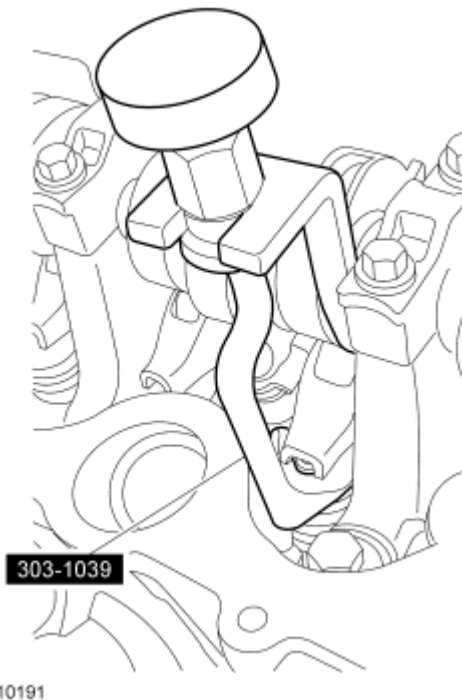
Compressing Spring Using Special Tool (303-1039)
